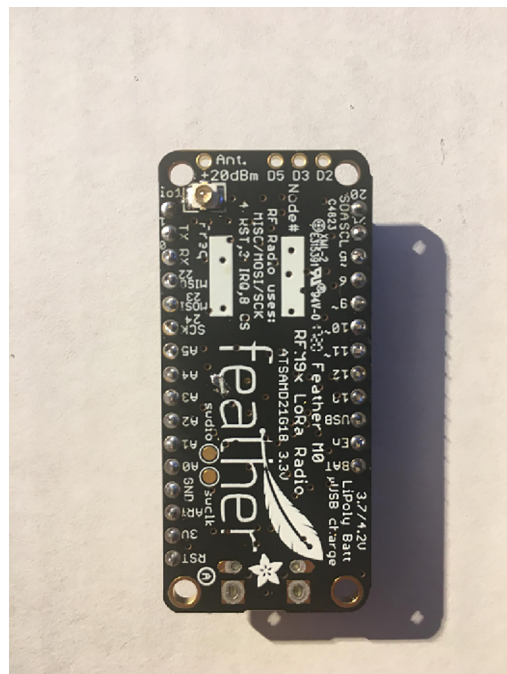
Bottom side of the Development Board for the hub after soldering on the Antenna Connector.
